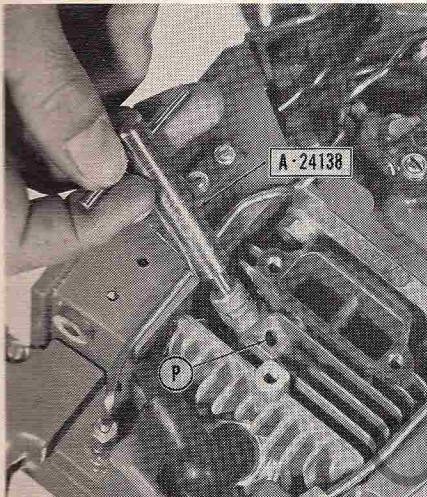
Cleaning compression relief valve seat using Homelite tool No. A-24138. Hold the engine with relief port (P) down so that carbon scraped from seat will fall out.
